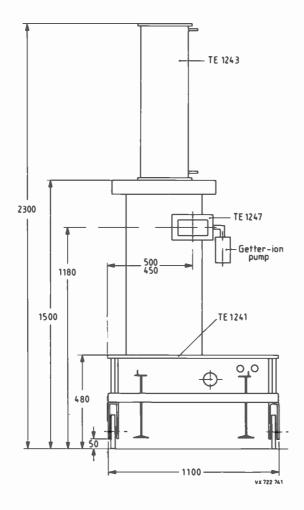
Complete assembly consisting of tube, trolley, oil tank, focus mount, r.f. transition and operational lead shieldings.
